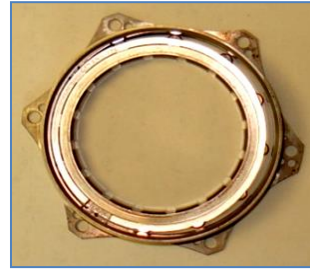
Pratt & Whitney bearing tested at NRC-Ottawa.
